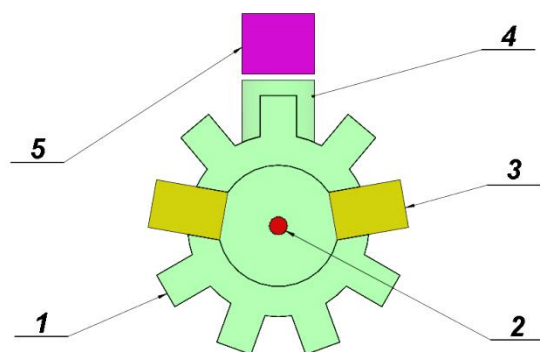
The bolt of grenade firing rifle XM25; configuration for ejecting the cases on the right side (frontal view): 1 – block of the bolt, 2 – striking pin, 3 – extractor, 4 – ejector, 5 – controlling pin, 6 – pawl
